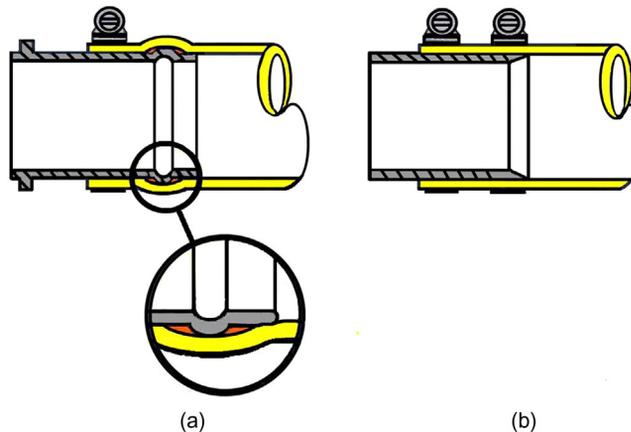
(a) Incorrect and correct installation of hoses on fixed pipes. (b) Hoses attached to stainless steel pipes should be clamped at the very end of the pipe to minimize the amount of dead space between the clamped portion and the end of the pipe. *Courtesy of Huub Lelieveld, personal communication.
